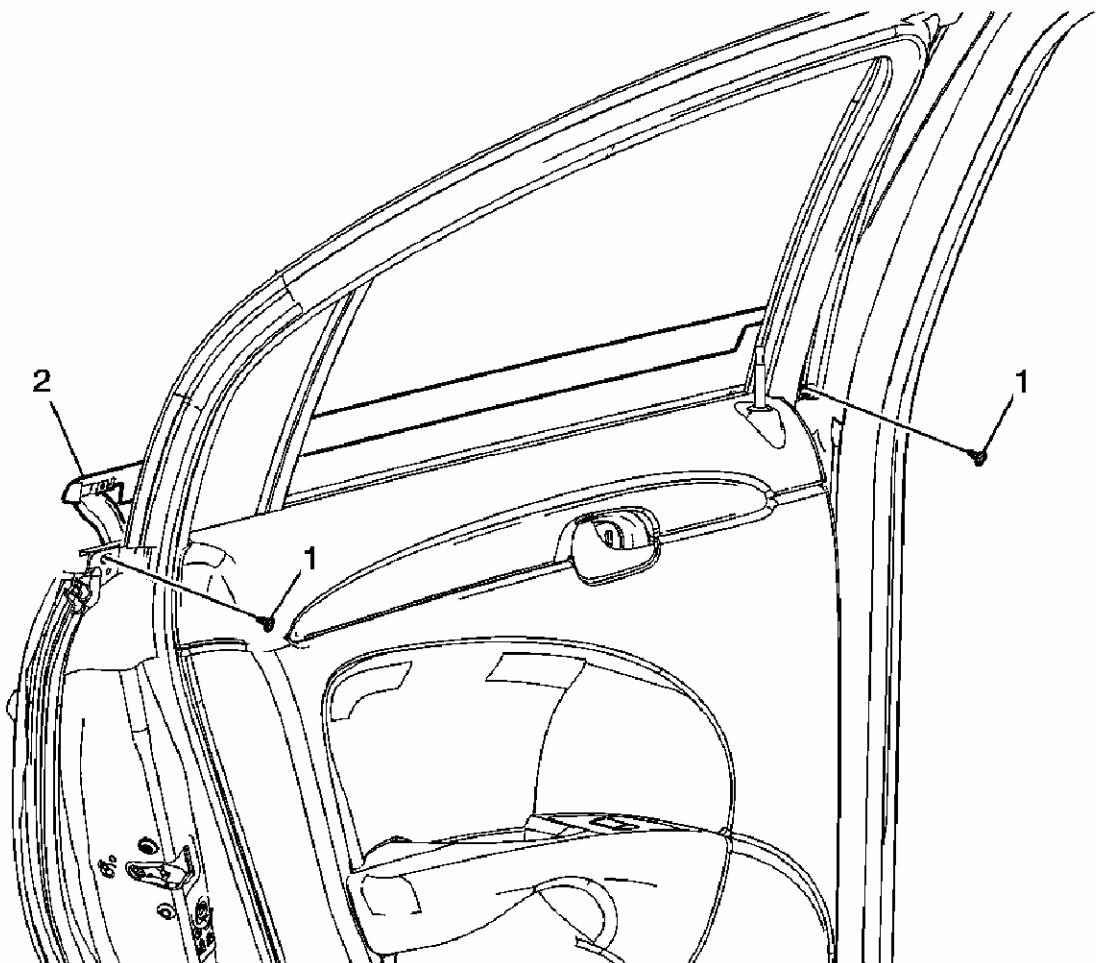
Identifying Rear Side Door Window Belt Outer Sealing Strip
